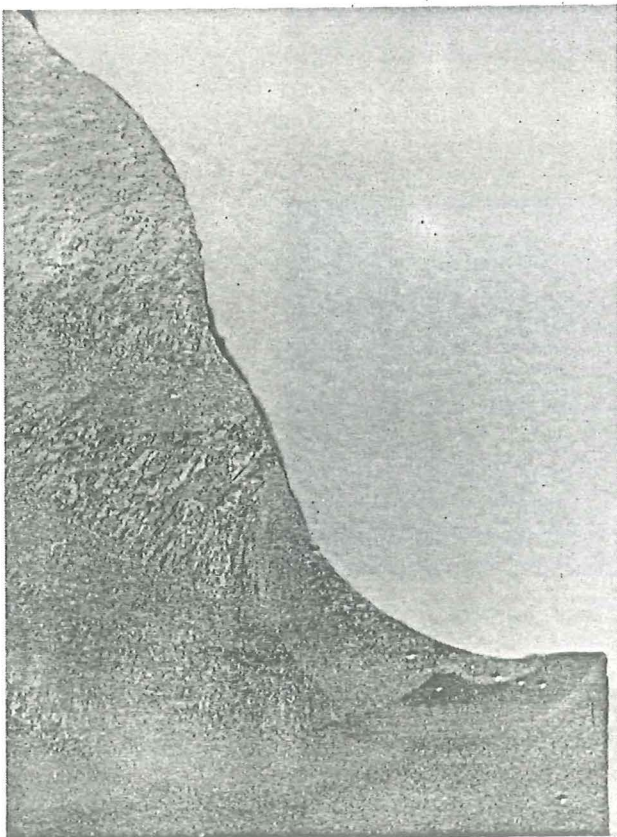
Hardness measurements at the weldtoe area (as welded)
